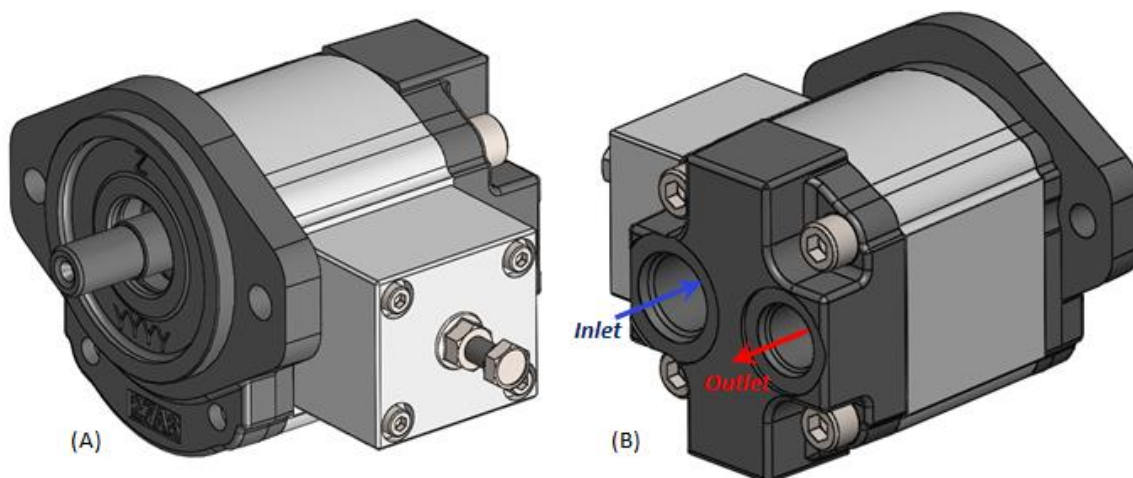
Final complete assembly with (A) flanges and end cover; (B) Inlet and outlet ports.
